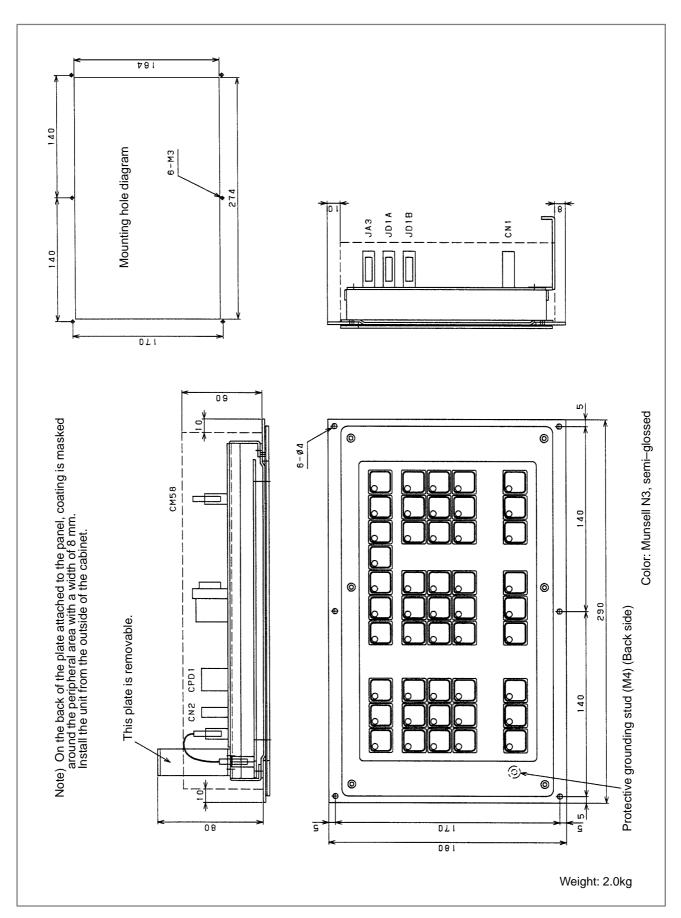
Distributed I/O machine operator's panel (290 mm wide)
